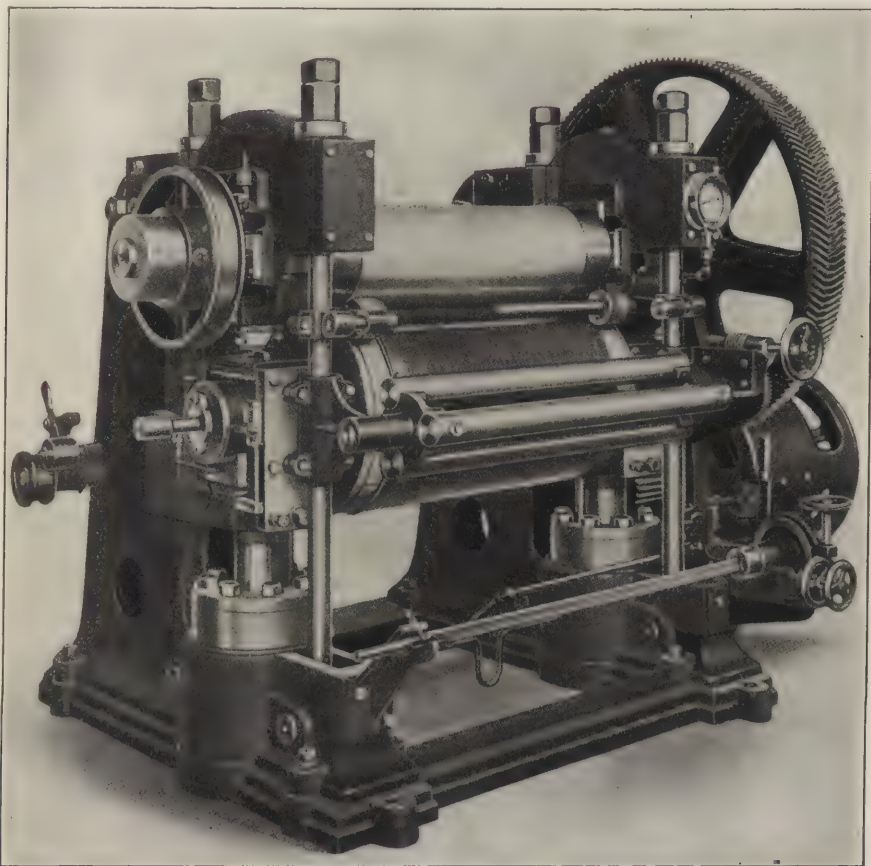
Improved Type Hydraulic Schreiner Calender. (Text. Fin. Mch. Co.)
